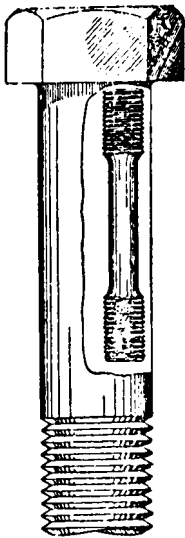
LOCATION OF STANDARD ROUND 2-IN. GAGE LENGTH TENSION TEST SPECIMEN WHEN TURNED FROM LARGE SIZE BOLT
